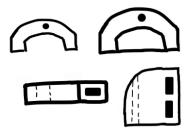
Top (upper left) and side (lower left) view of the middle and lower finger attachment pieces and back (upper right) and side (lower right) view of the upper finger attachment piece.
